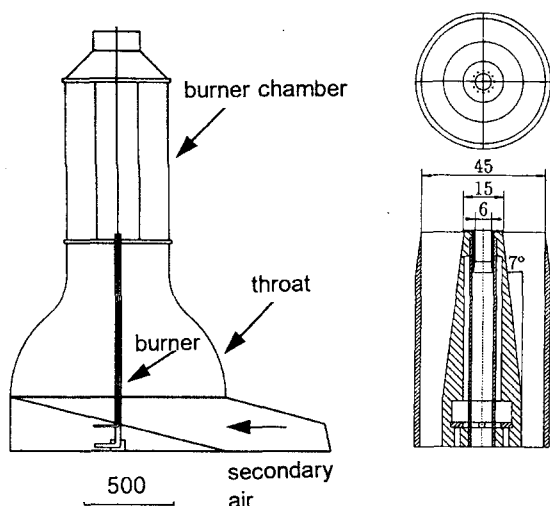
Burner, burner throat and chamber, and details of the burner nozzle. All distances in millimeters.
